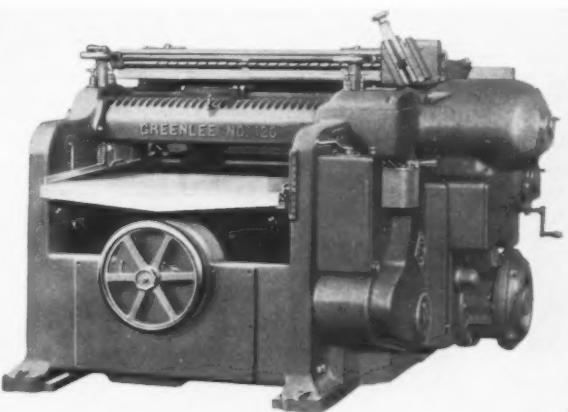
Direct connected motor built into double planer gives smooth operation of the cutting cylinder
